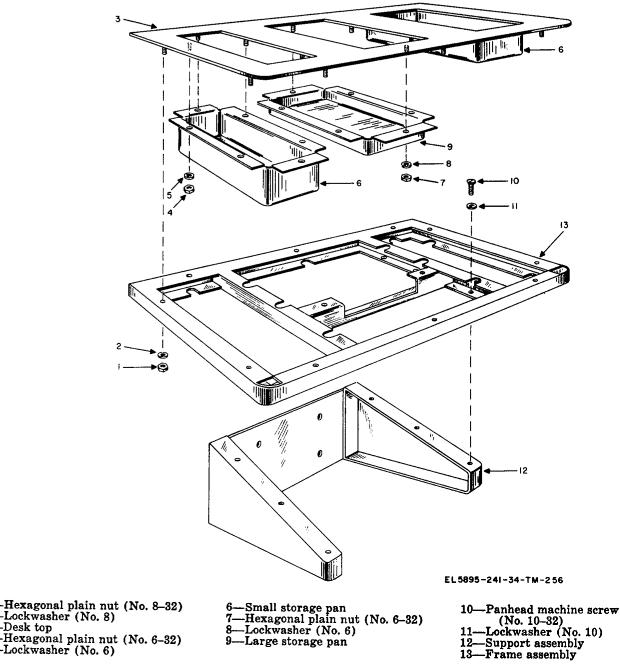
Storage desk (part of OA-2054/FSW-8), exploded view.
